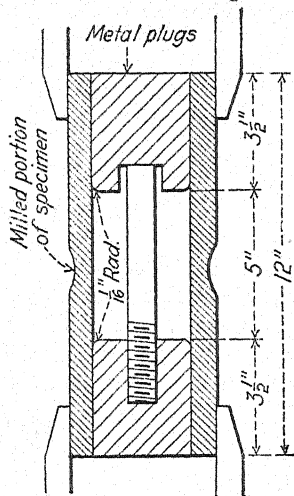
Metal Plugs Used for Tension Test Showing Location of Plugs in Test Specimen.
